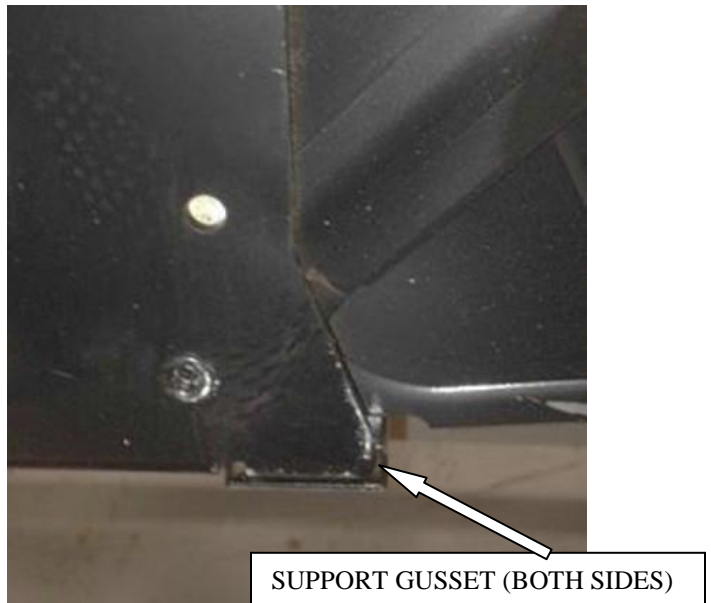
Lower gusset on the outboard side of step mounting plate
